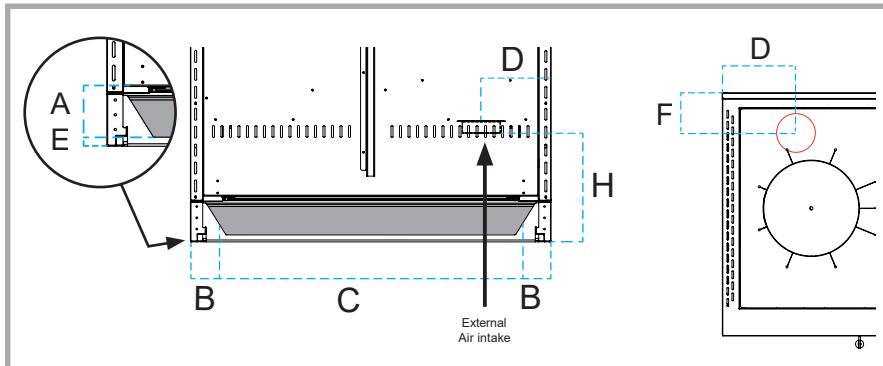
Installation with air intake in the room of installation and installation with air intake directly connected to the wood fired cooker.
